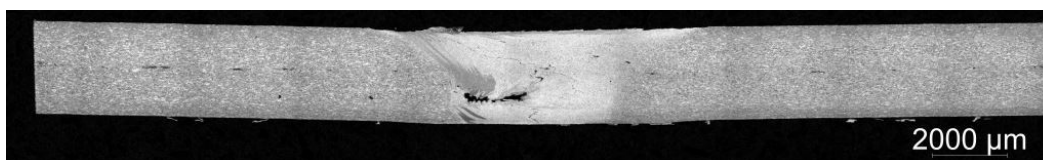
Microscope picture of the welding in Case 4
